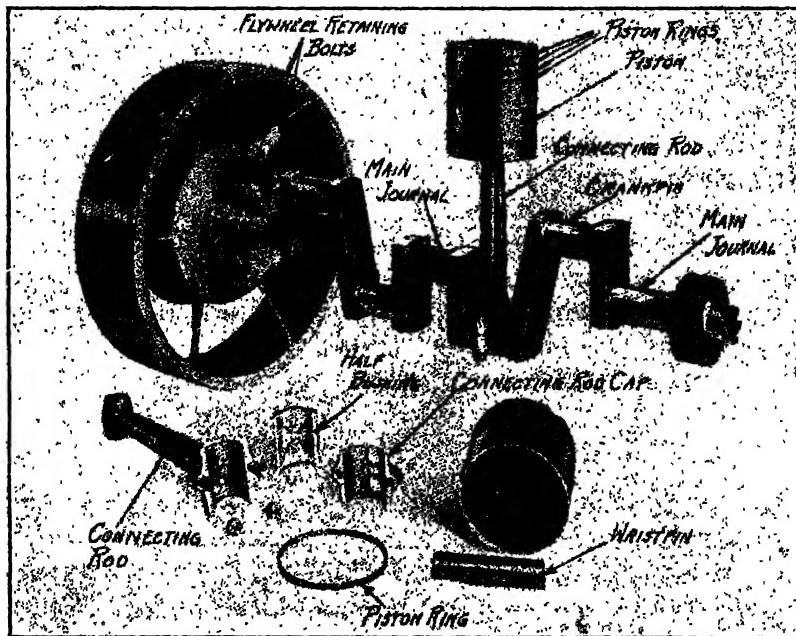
Typical Piston, Connecting Rod and Crankshaft Assembly.
